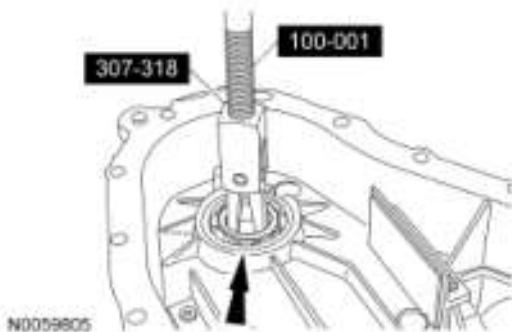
Removing Bearing Using Special Tools (100-001, 307-318)
